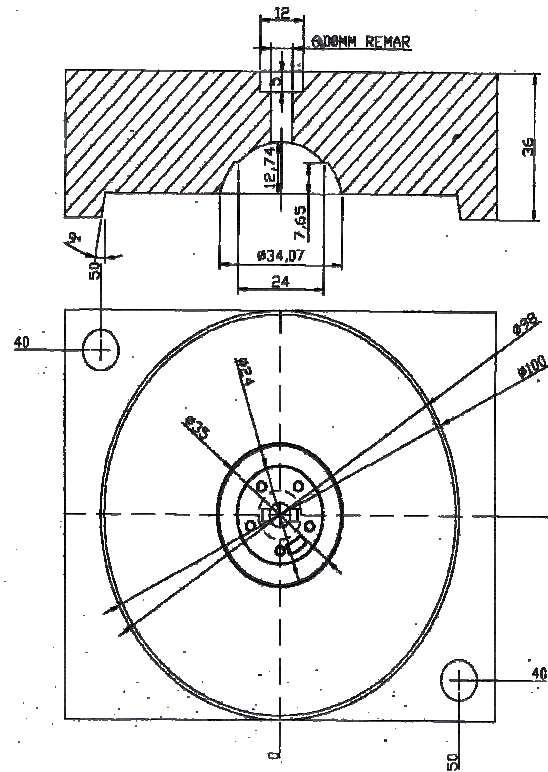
Part drawing of the Die block used to manufacture Deoball
